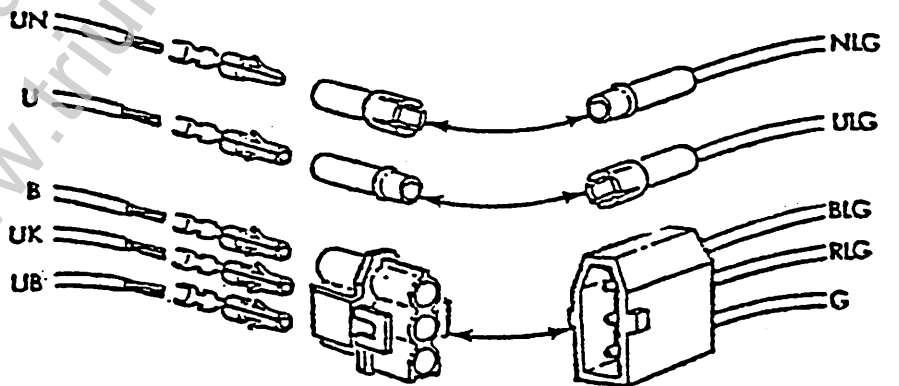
ALTERNATIVE WIRING CONNECTIONS.
